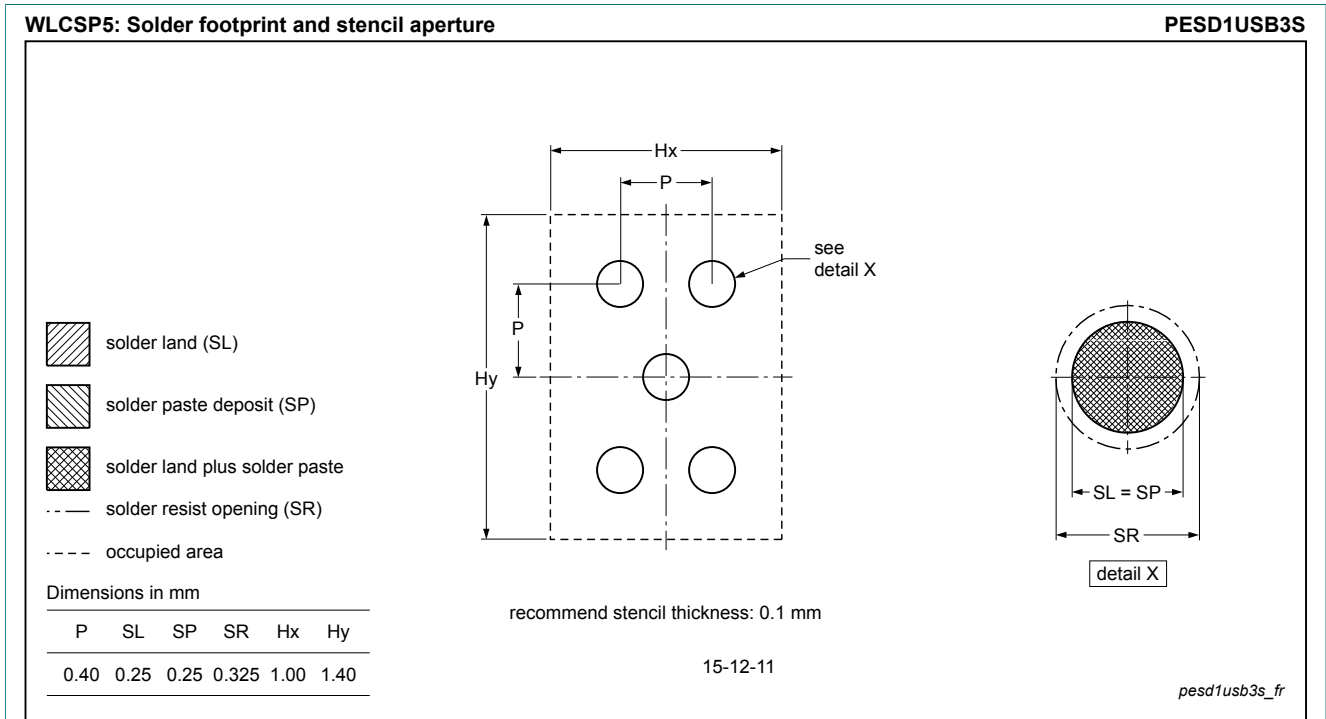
Soldering footprint WLCSP5 (PESD1USB3S)
